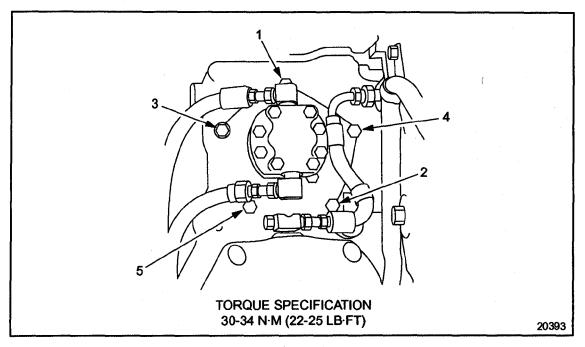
Fuel Pump Drive Retaining Bolt Torque Sequence
